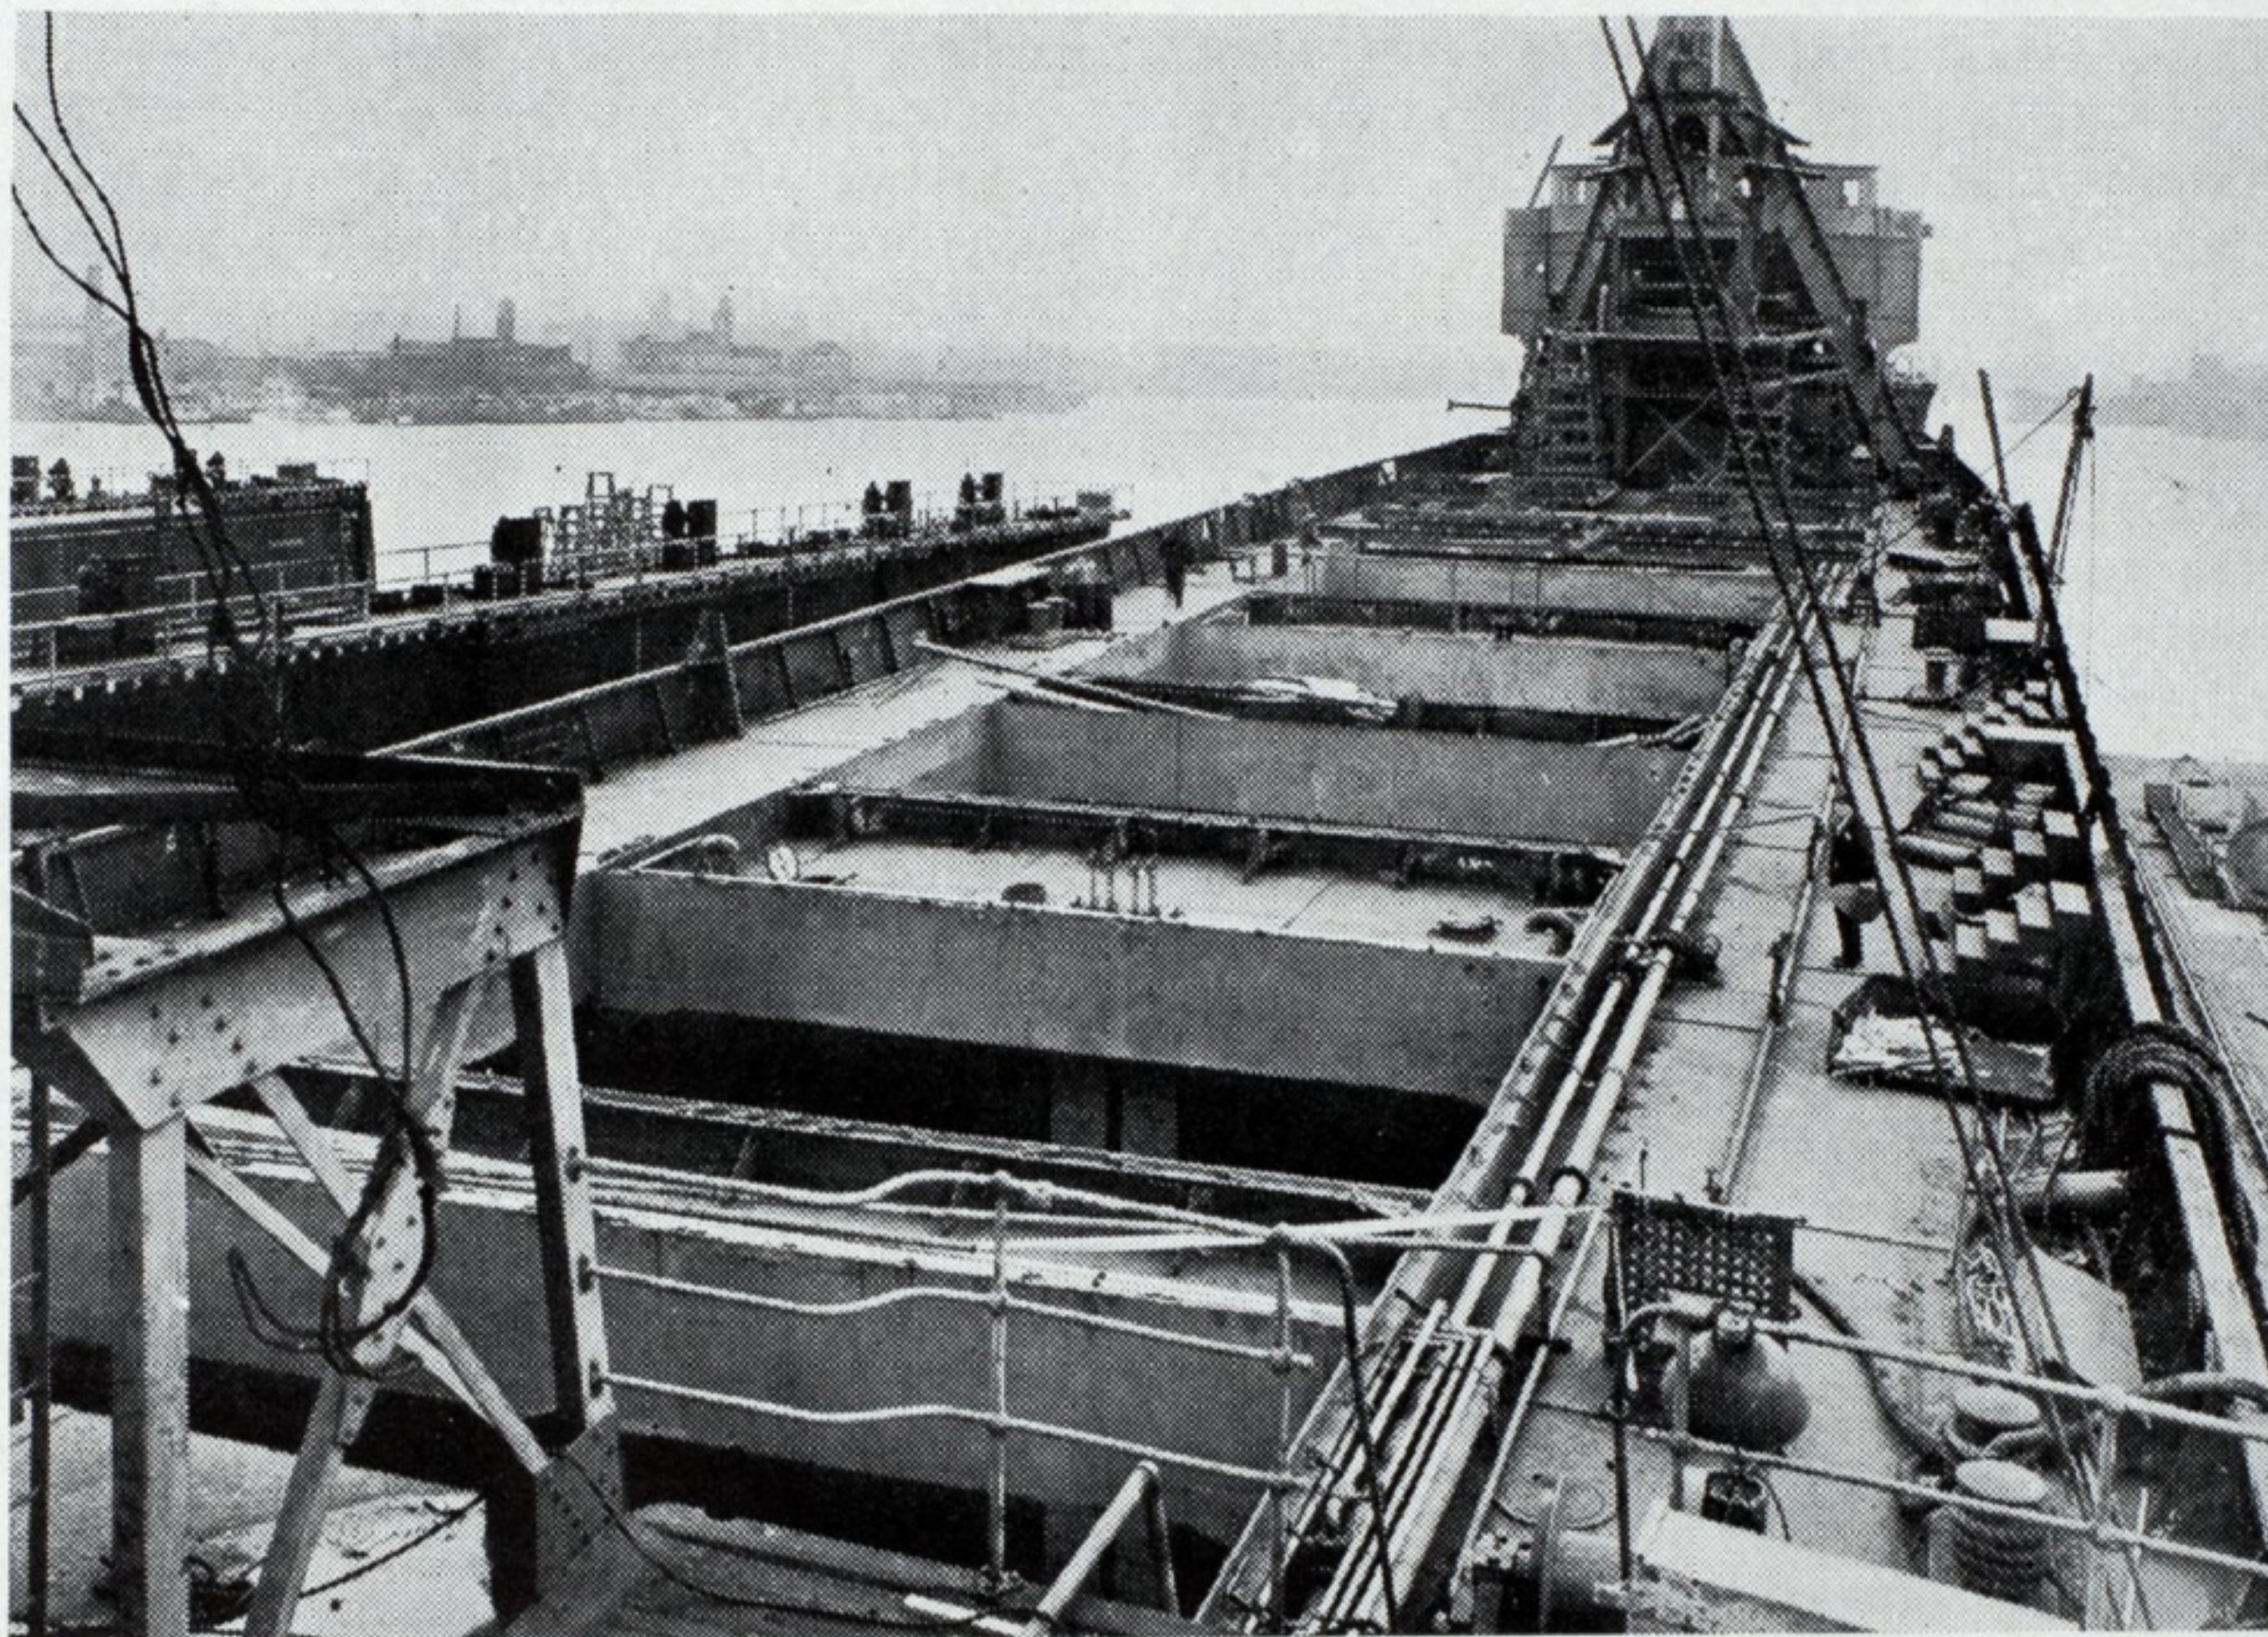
The S. S. ACHILLES, looking forward on deck, showing "A" frame structure for supporting the boom conveyor, also arrangement of hatches. Photograph taken about April 15
